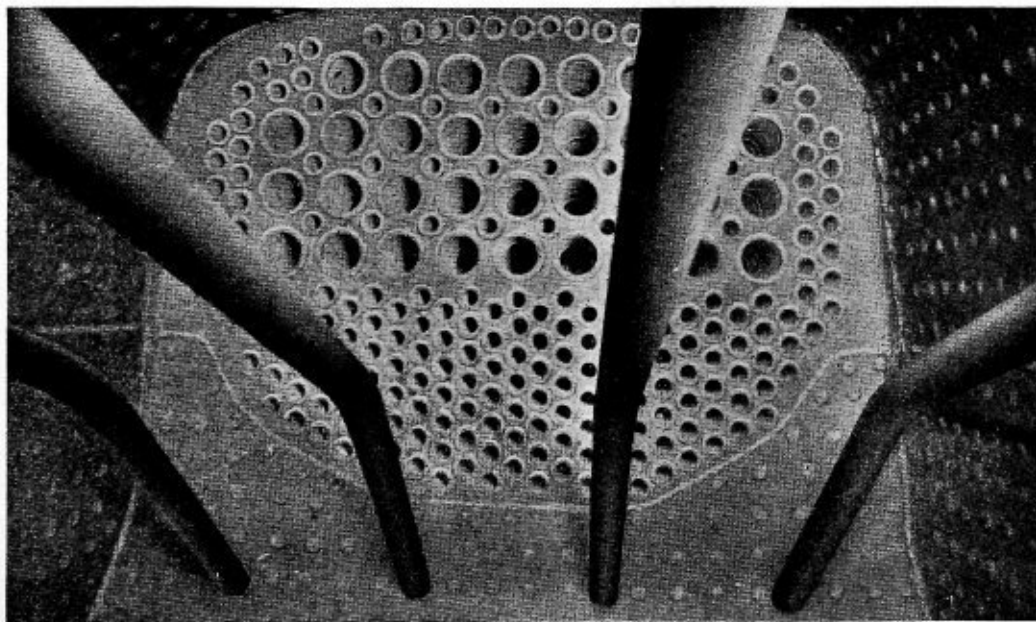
Back Flue Sheet, Locomotive Firebox; Tubes and Superheater Flue Beads Welded to Sheet; Patch Applied on Crown Sheet; Side Sheets and New Half Flue Sheets Welded in Place by Metallic Arc Welding
